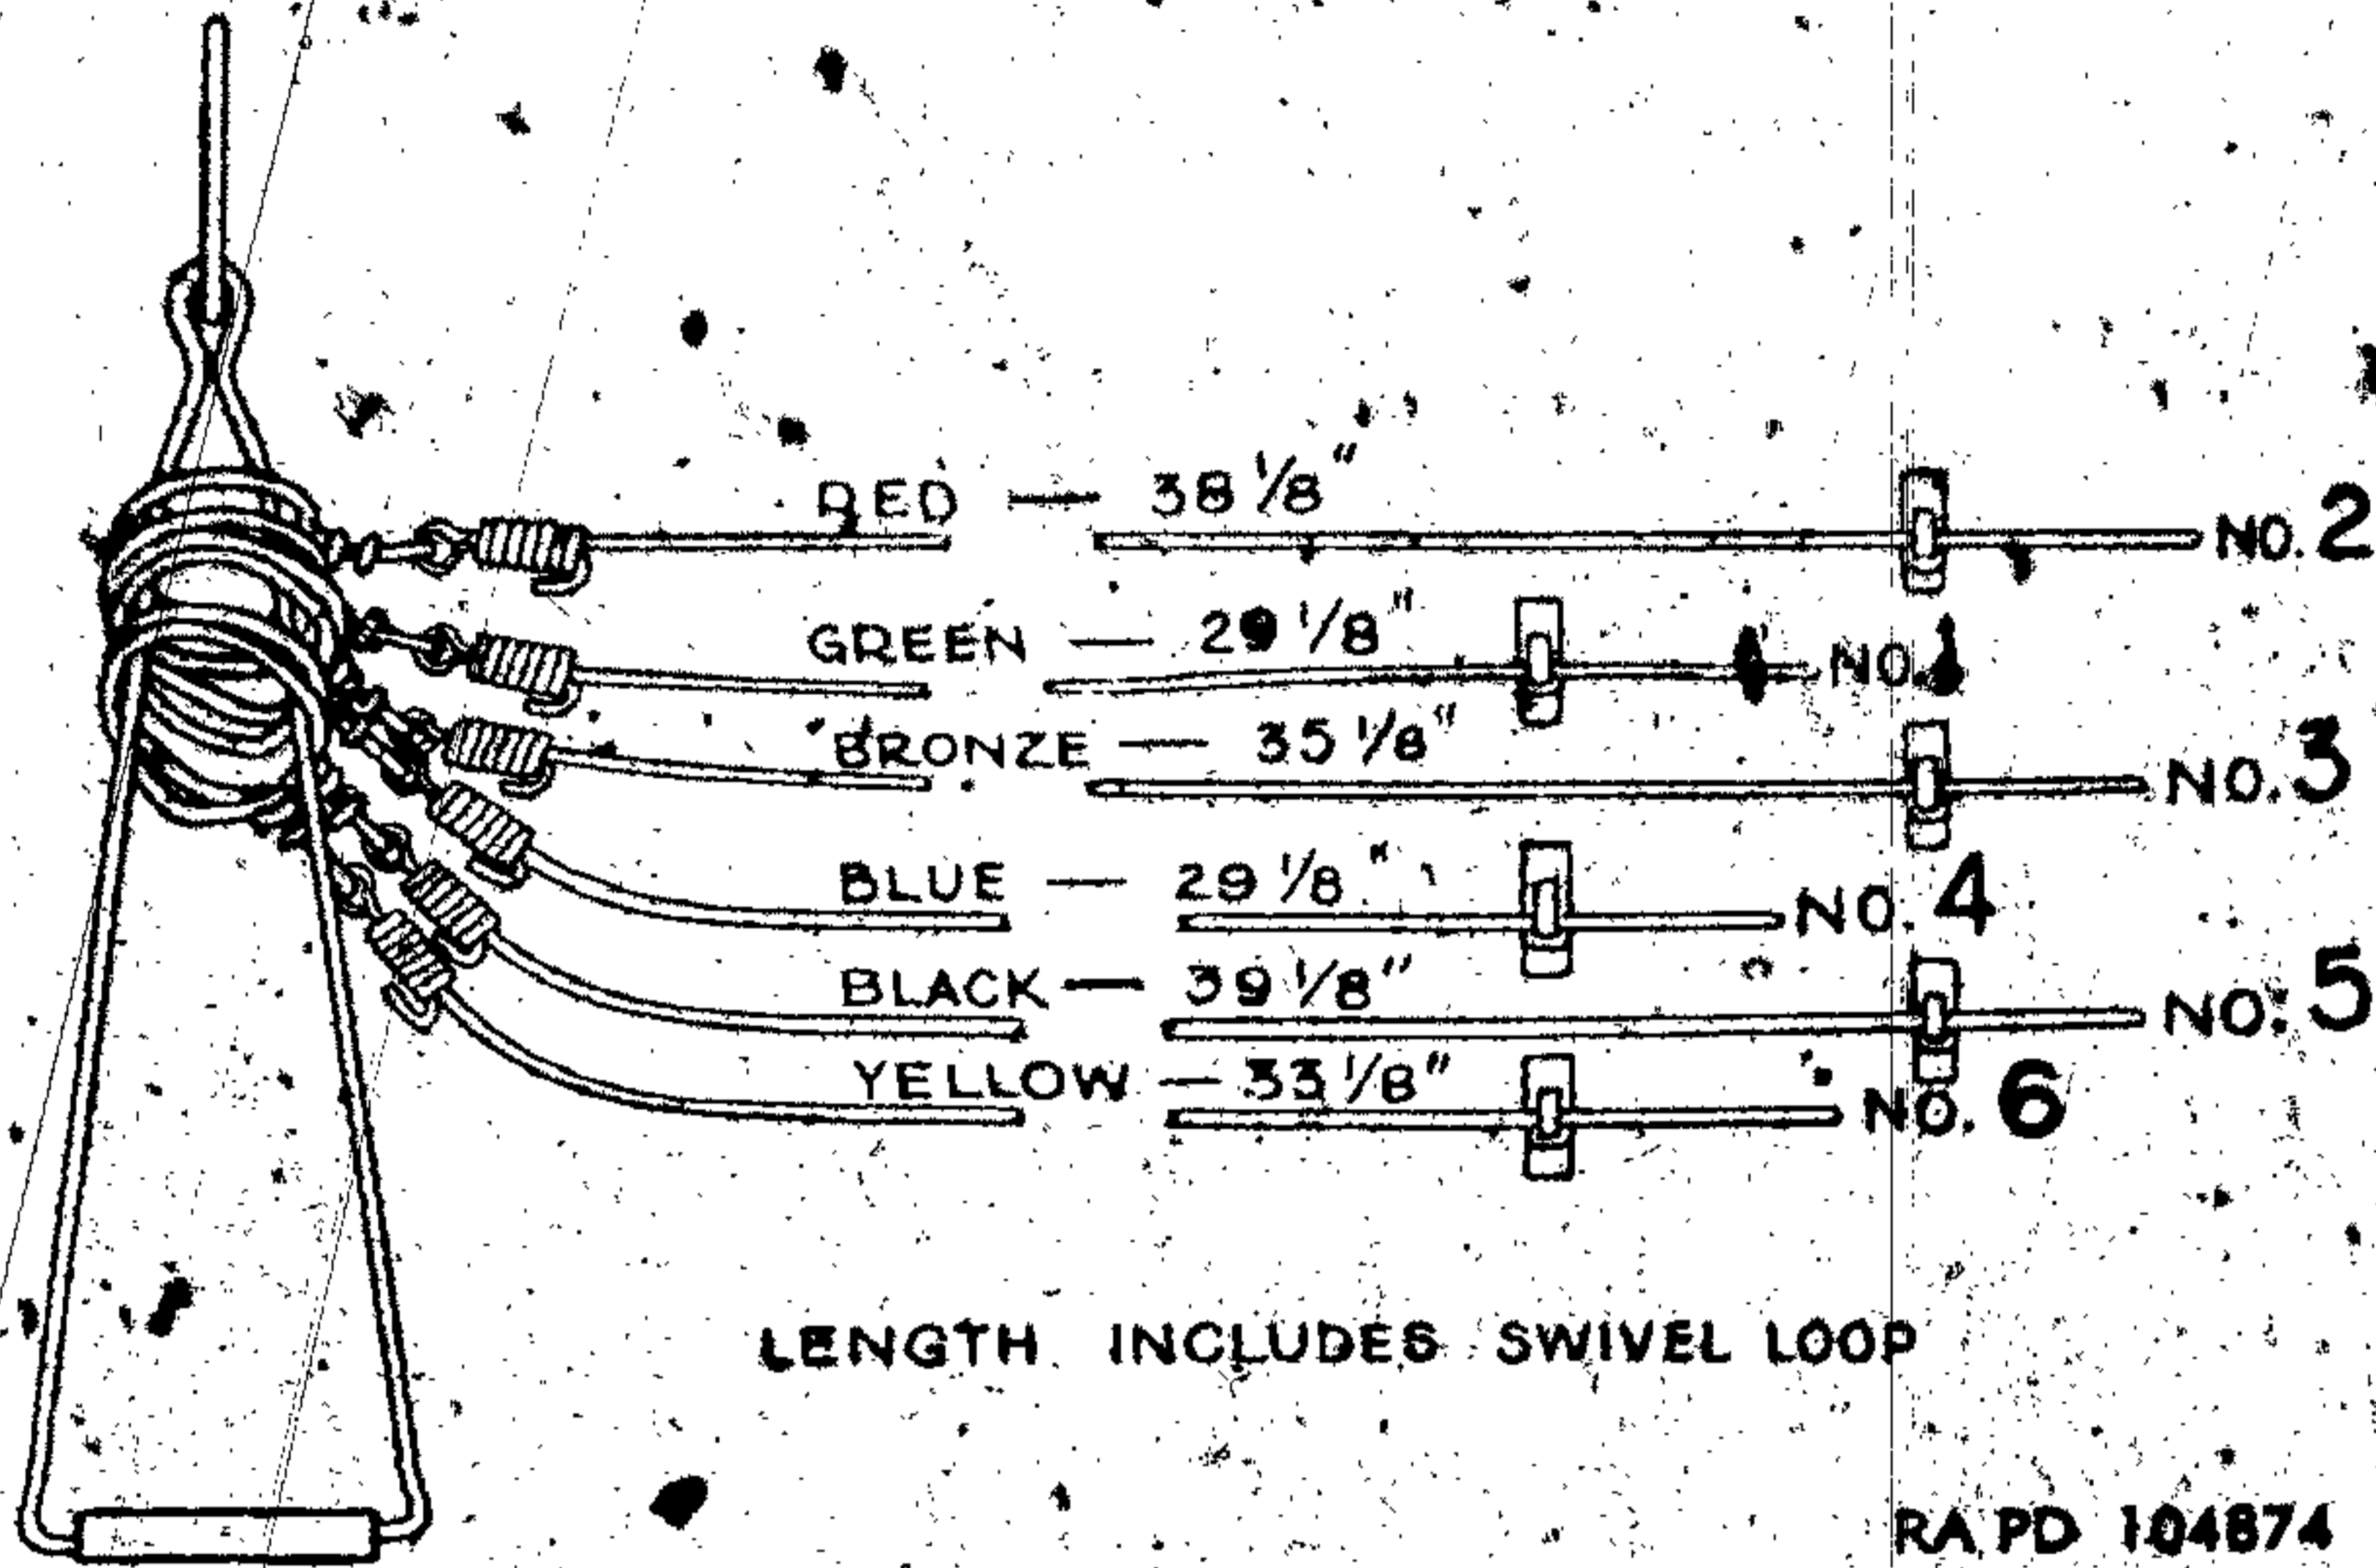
Hanger and arming wire assemblies for adapter, cluster, M24A1.
